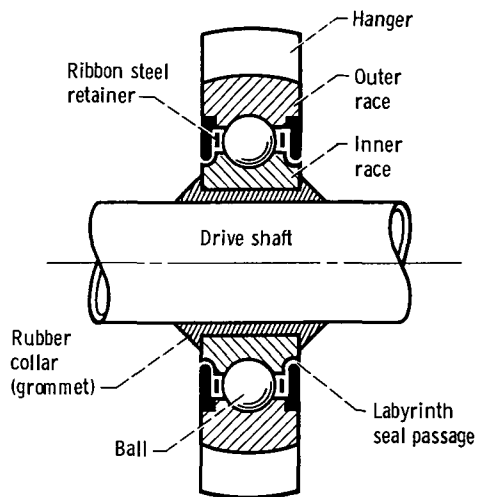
(a). - Cross section of bearing mount on OH58A drive shaft (dash 3 bearing).
